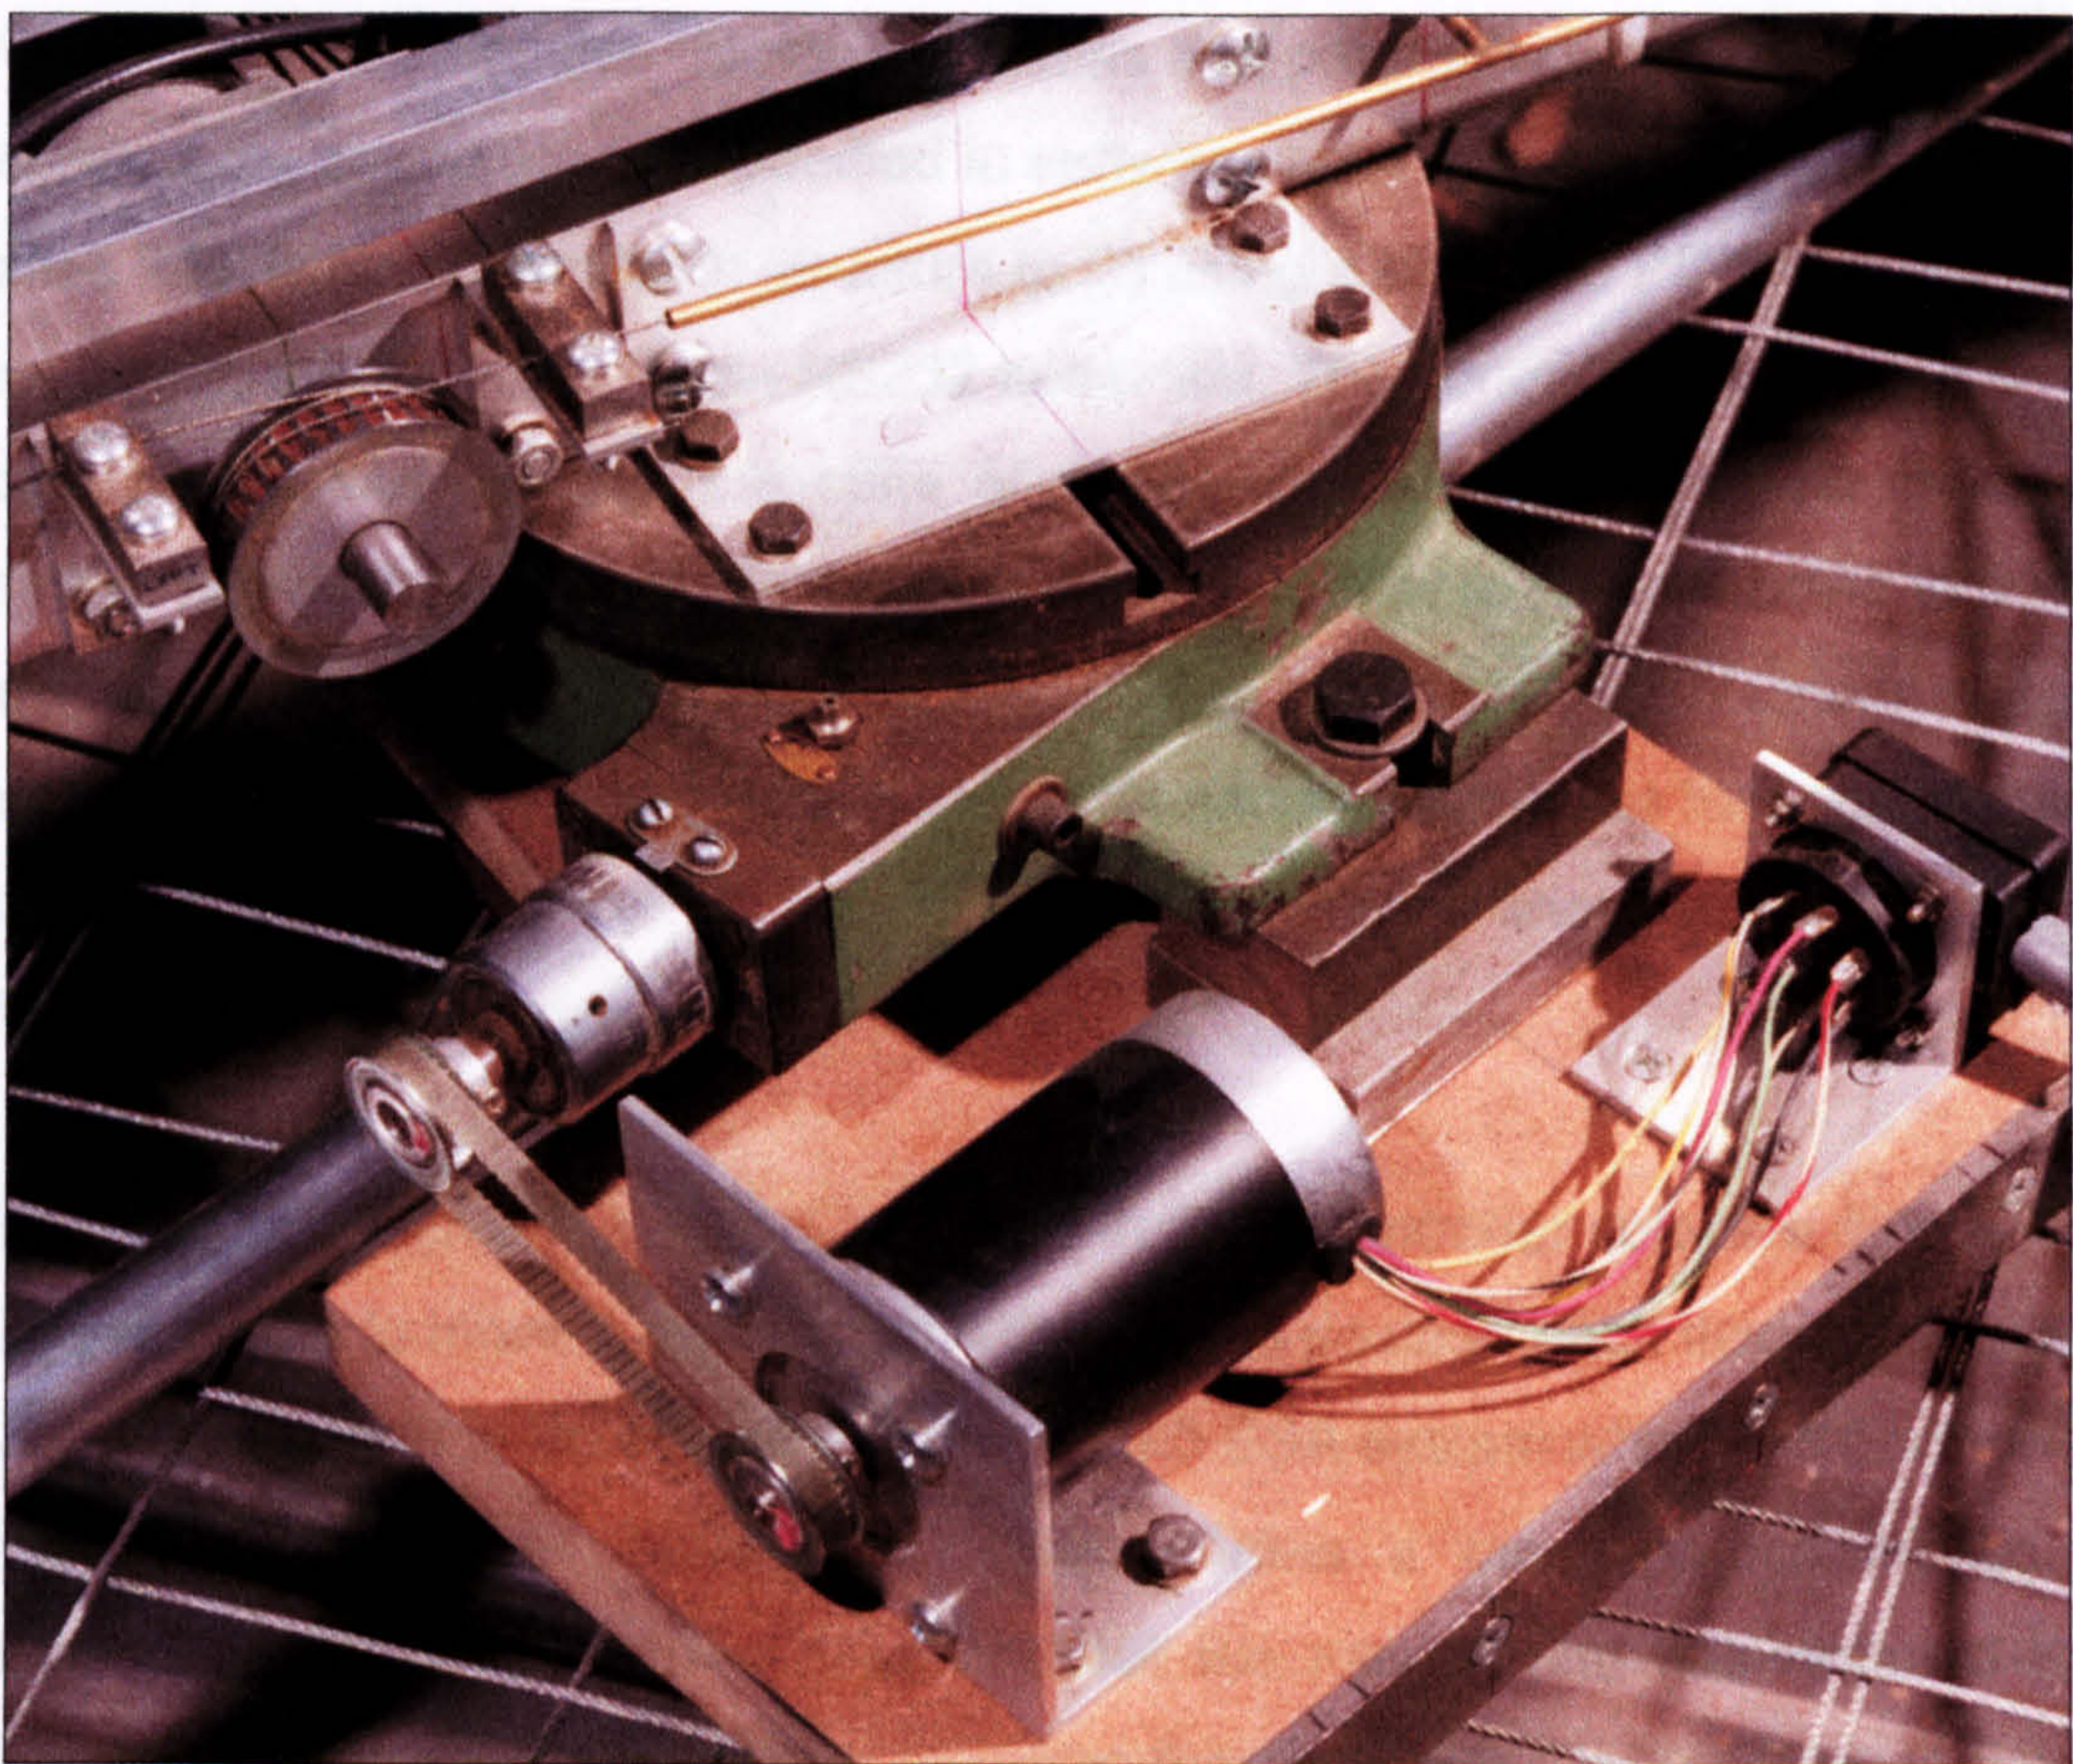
Detail of the two stepper motors and drive mechanisms.
